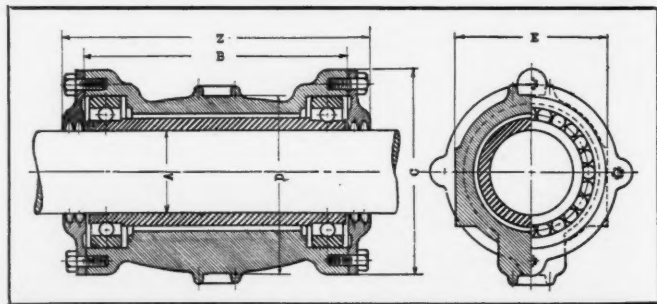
Cross-sectional View of the Fafnir Bearing Box
